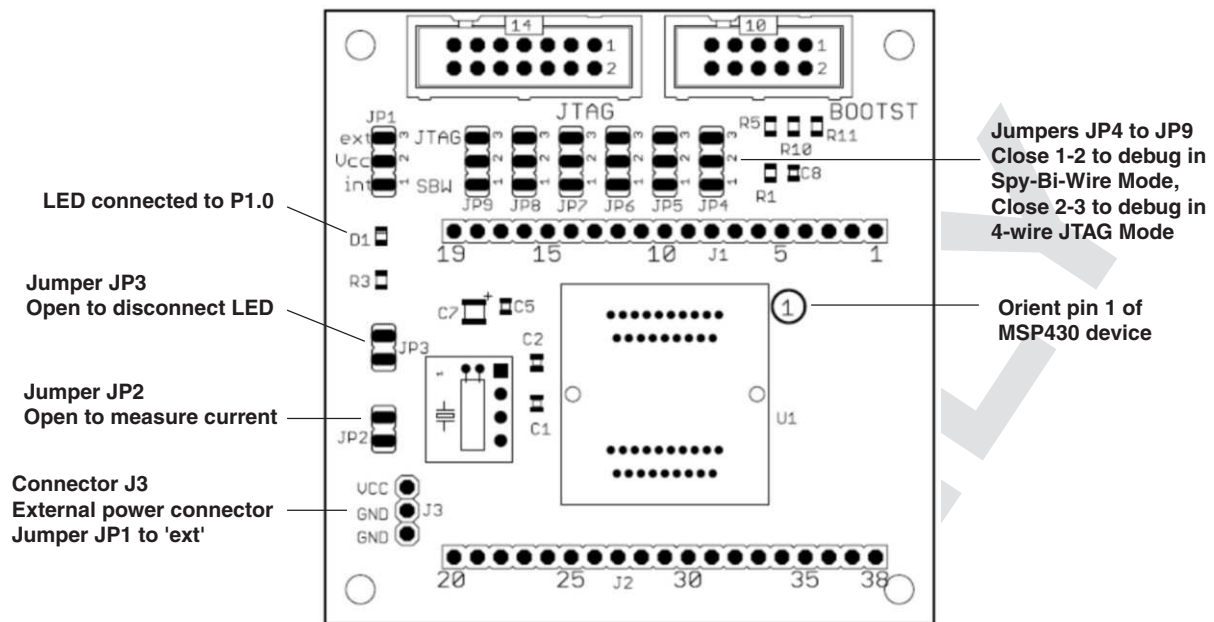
MSP-TS430DA38 Target Socket Module, PCB
